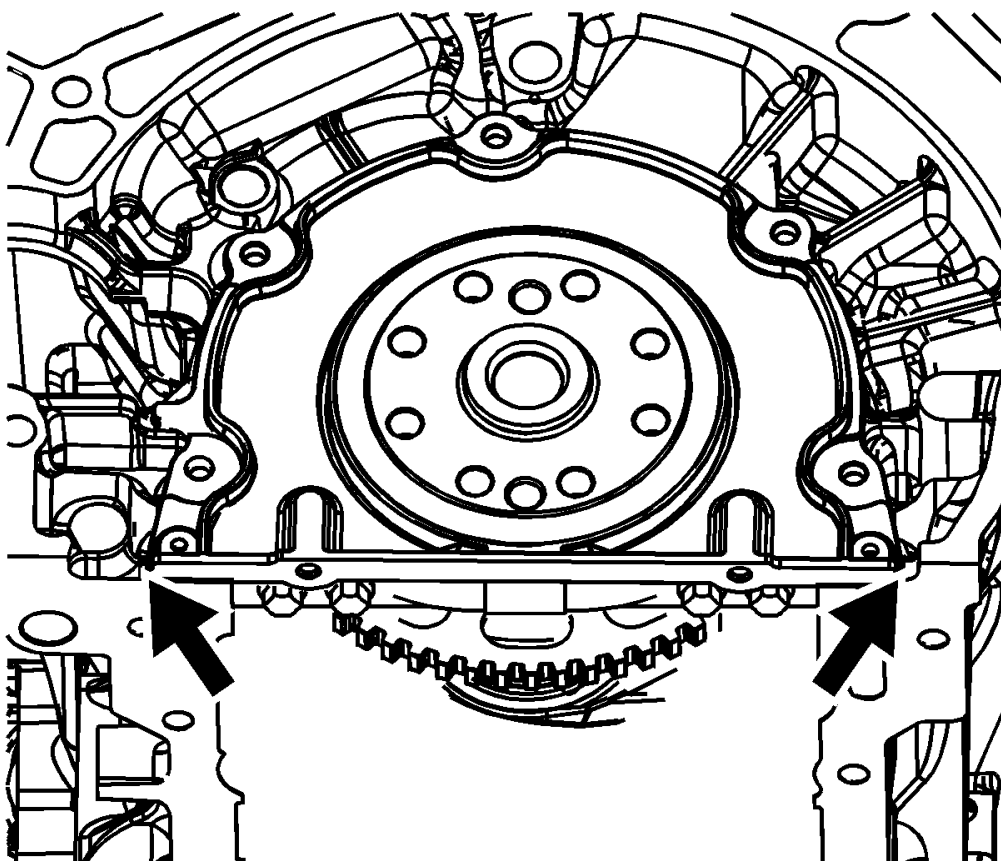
Crankshaft Rear Oil Seal Housing Pry Points
